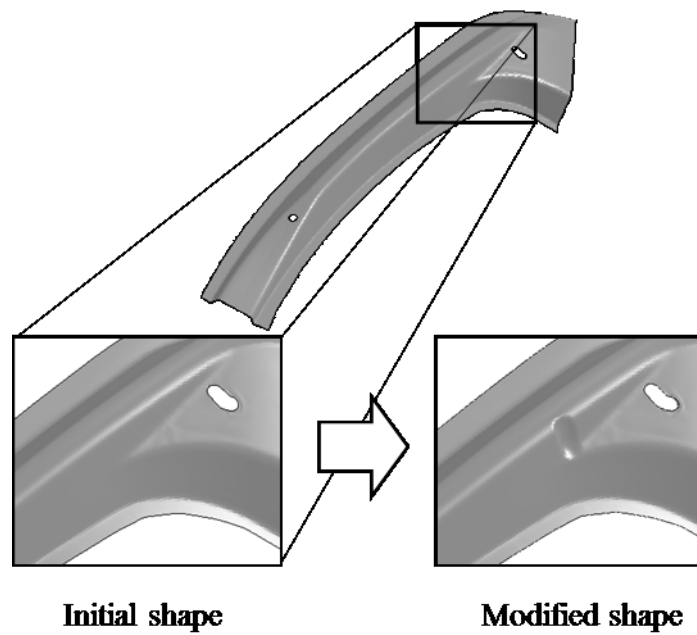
Bead added to initial shape to reduce torsion springback suggested by springback-root-cause analysis
